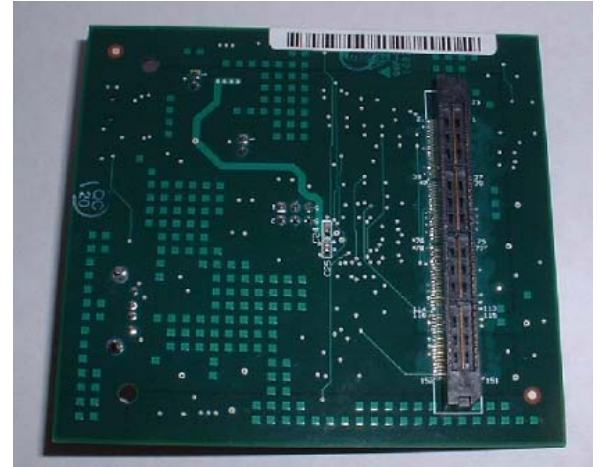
Bottom View of the ISPI362 OTG Add-On Card for PXA250/255 IDP
